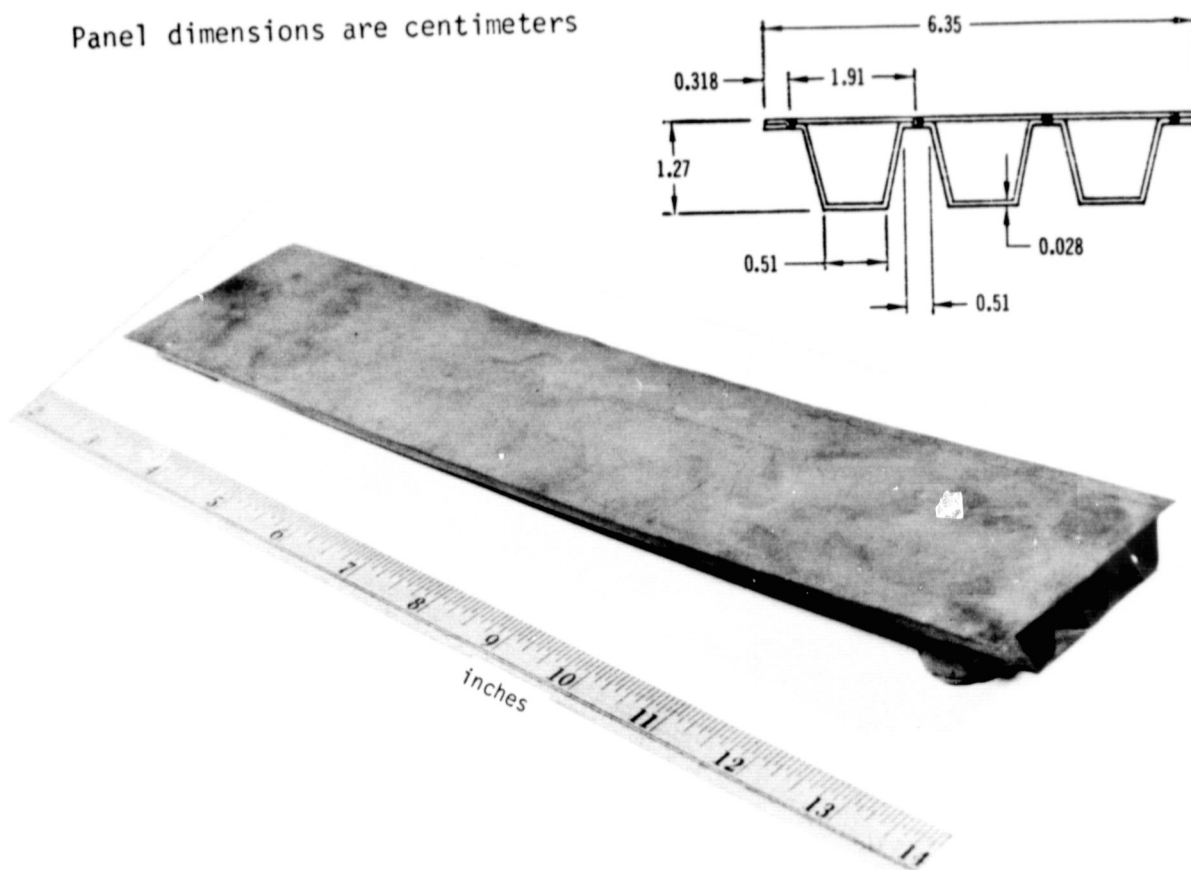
SUBSIZE PANEL R1 CROSS SECTION AND PHOTOGRAPH AFTER TEST
